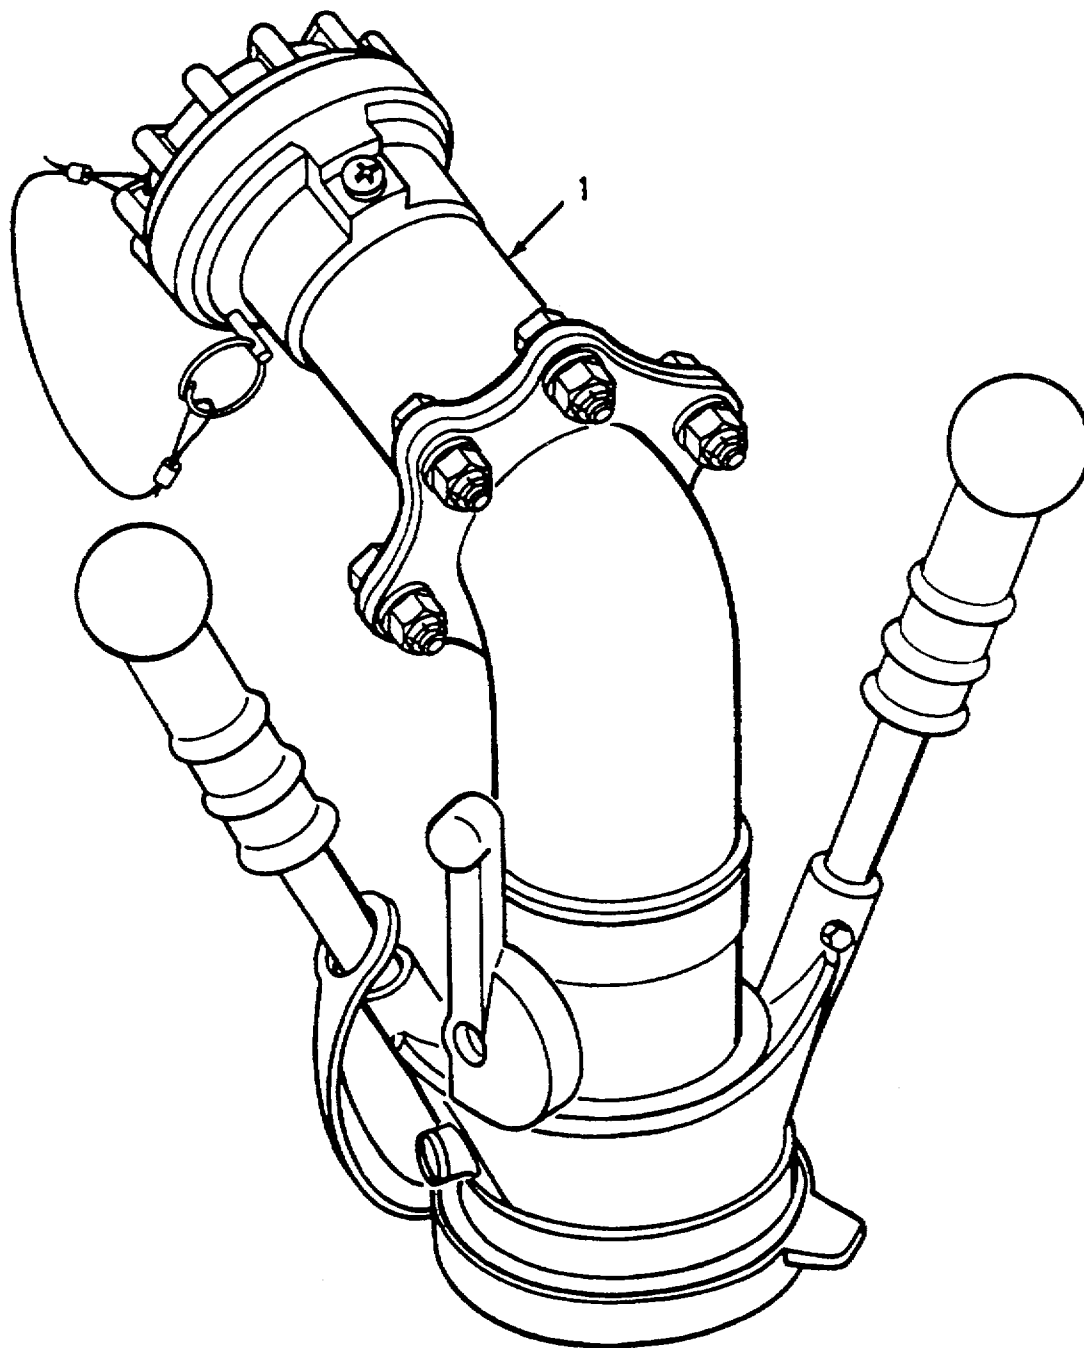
Pressure Fueling Nozzle Assembly (HTARS100) (Sheet 1 of 4)
